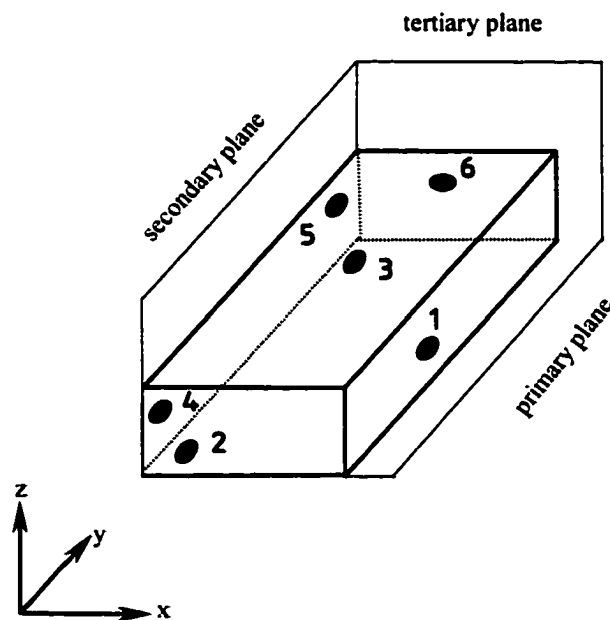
Locating planes and datum targets in 3-2-1 fixture.
